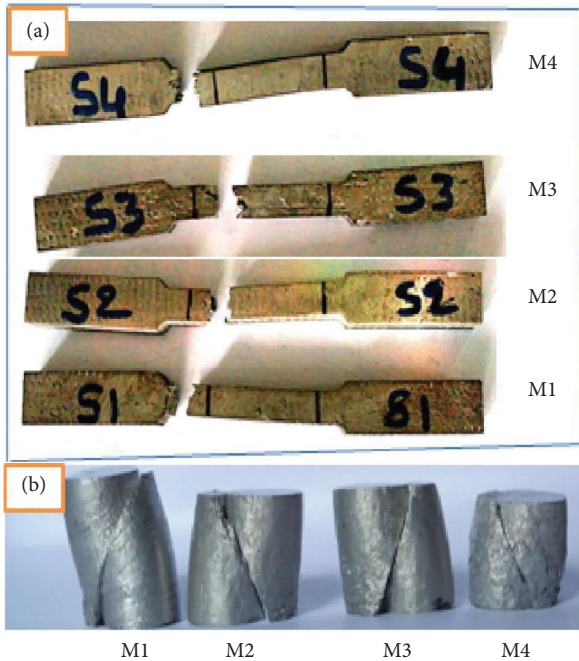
(a) Tensile and (b) compressive-fractured specimens.
